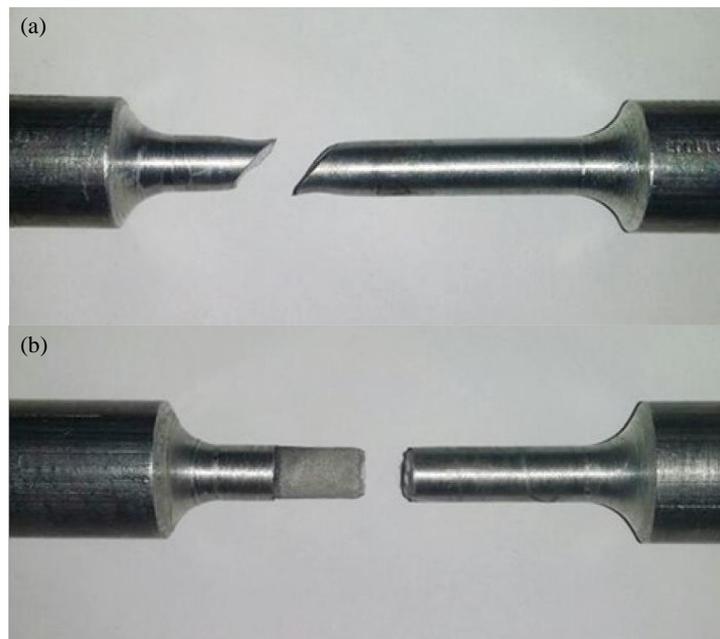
Fractured tensile specimens tested before (a) and after (b) hydrogen charging ( $R = 0.32$ ).
